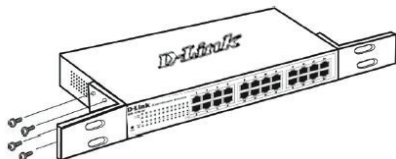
Attach the mounting brackets to DFL-260E / DFL-860E
